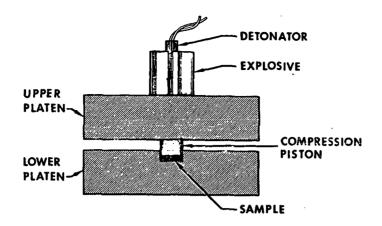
CROSS-SECTIONAL VIEW OF A SINGLE-PISTON PRESS
